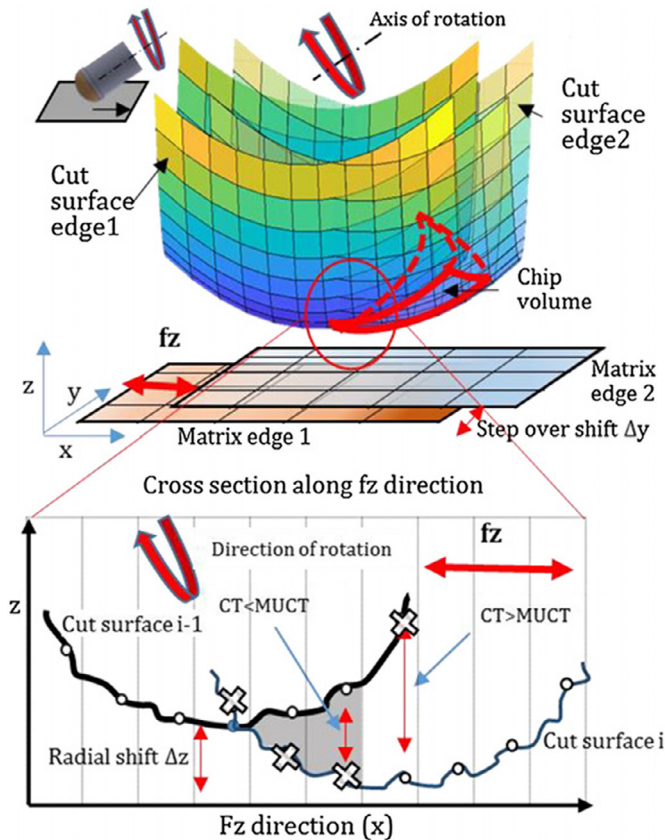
Surface generation model for ball end milling accounting for material spring back and cutting edge micro topography contributions. Top: 3D representation of the cut surfaces for two cutting edges. Bottom: cross section of the cut surfaces along the feed direction. The Z values are compared, the points indicated by a cross are disregarded while the dots define the generated surface [30].
